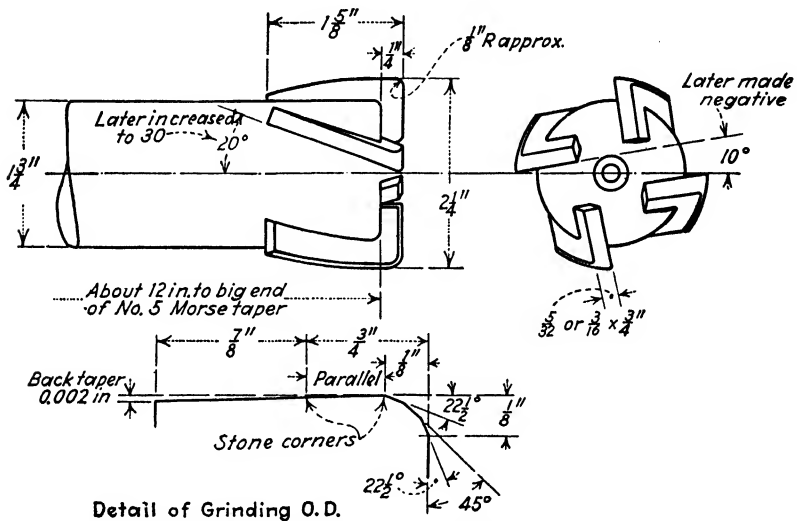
The main holes, Fig. 59, were brought to size with this tool. Modifications should be made as described in the text.
